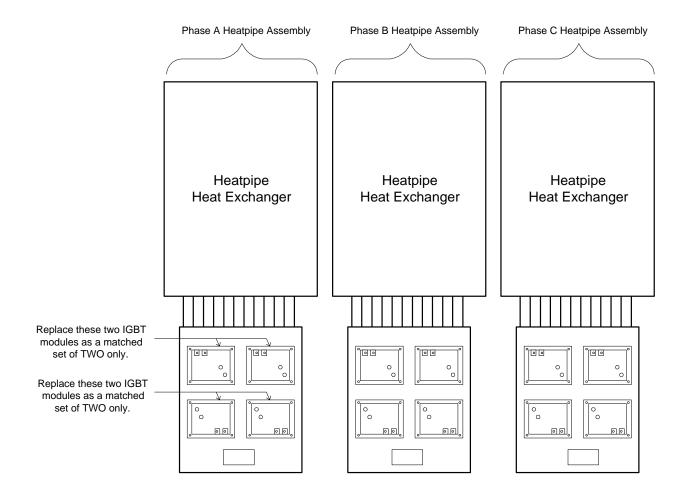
IGBT Module Location in 2300 V Drive Heat Exchanger Assembly
